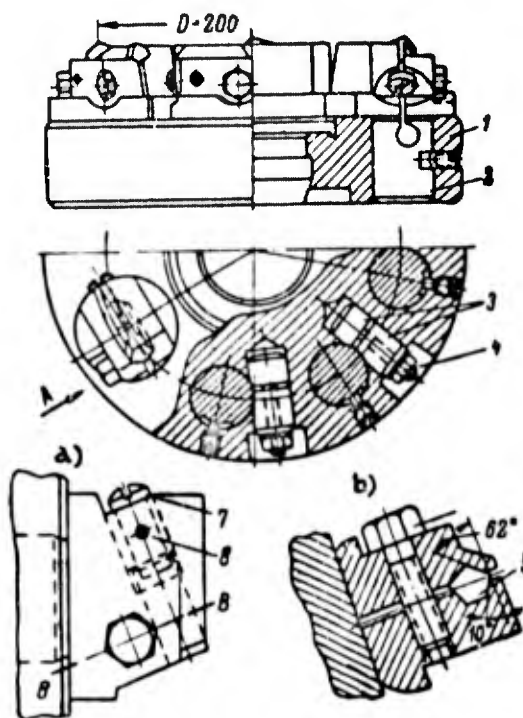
Orgavtoprom End Mill With Mechanical Fastening of Multiple-Point Hard-Alloy Inserts
